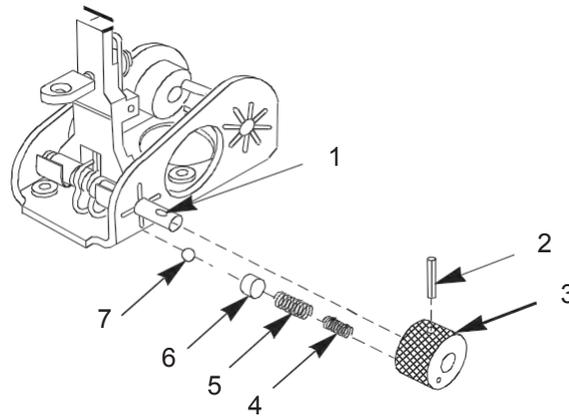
Machine Screw, Detent Spring, Plunger, Ball Detent, Windage Knob.
